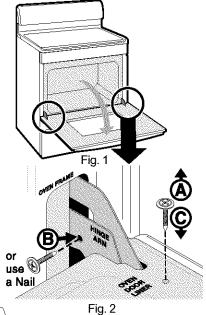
about 45 degrees Oven Door Oven Door Hinge
